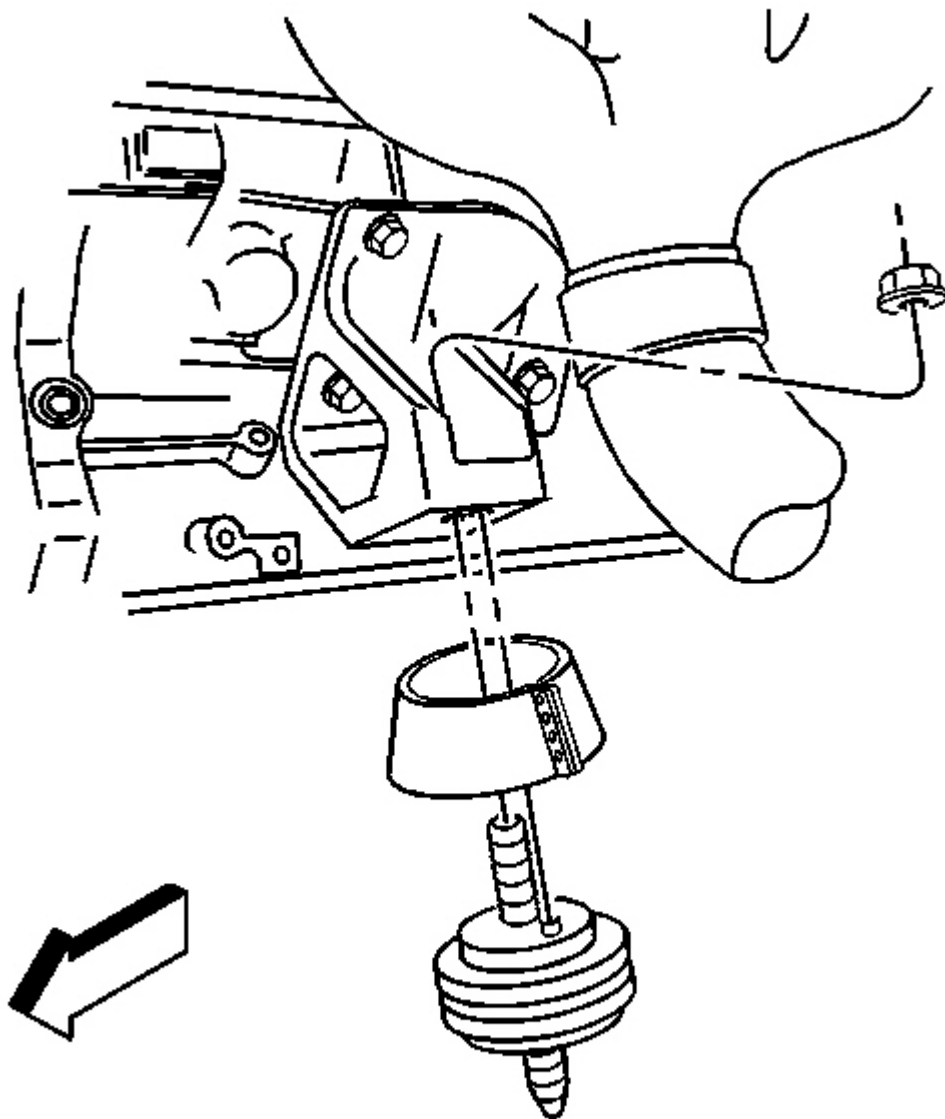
Engine Mount-To-Engine Mount Bracket & Nuts
